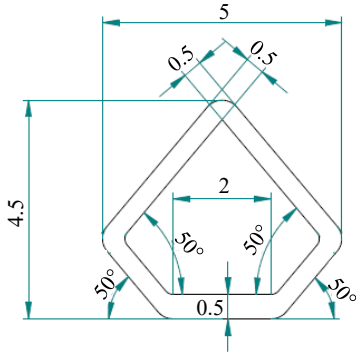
Pentagonal cross-section derived from the minimum angle and width for the 3D printer constraints. All the dimensions are in millimeters.
